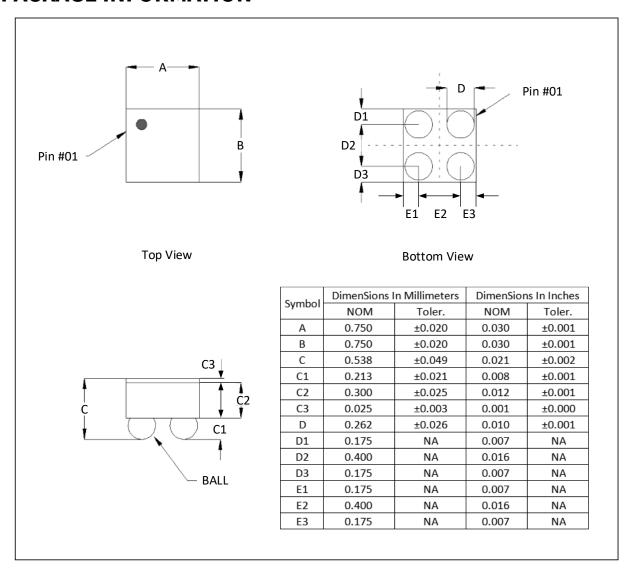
DSGBA-4 Package Shape and Dimension in millimeters and inches
